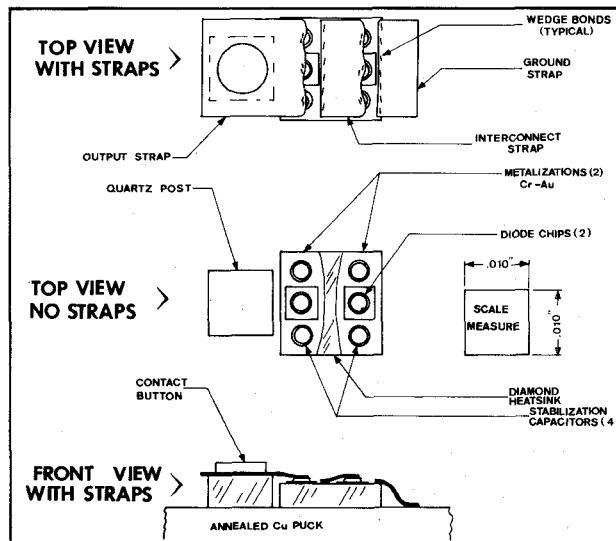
Detailed sketch of 40-GHz multichip assembly.
